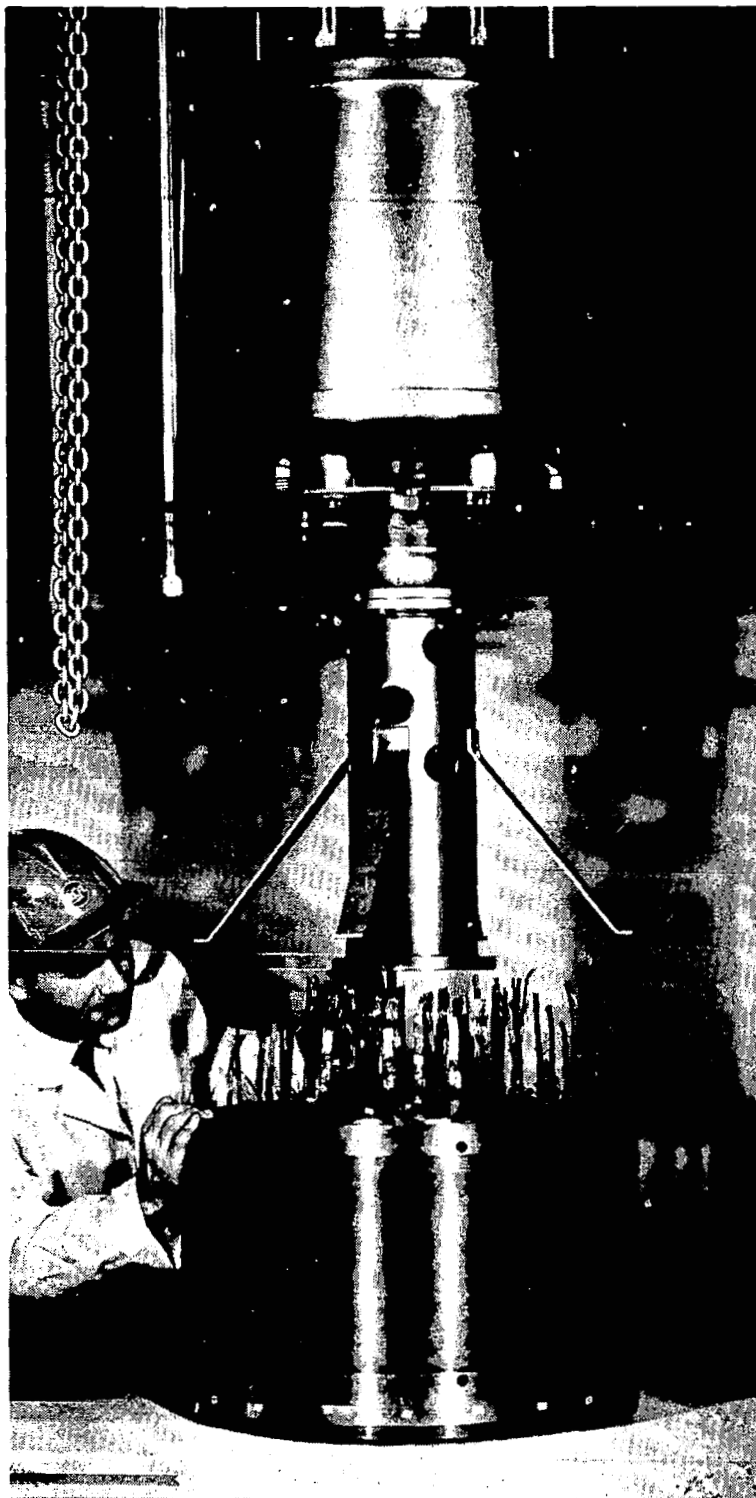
Top Plate Being Lowered onto Module and Outer Case Assembly
